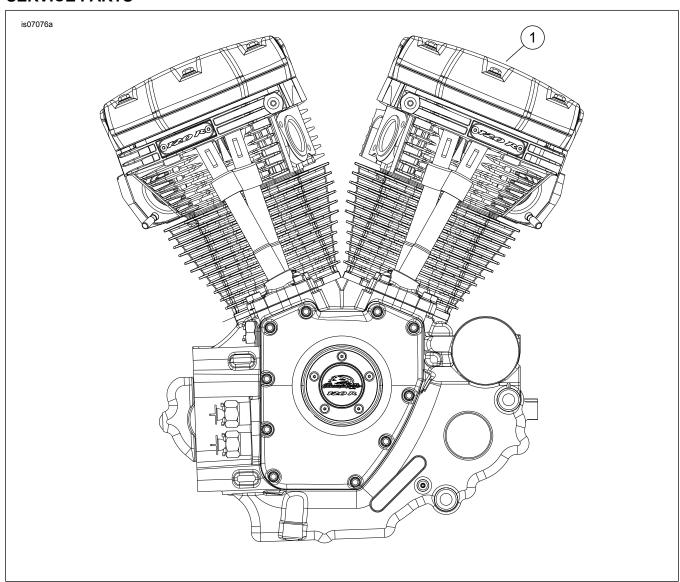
Engine Assembly, Screamin' Eagle Pro 120R Crate Engine (Beta) Complete
